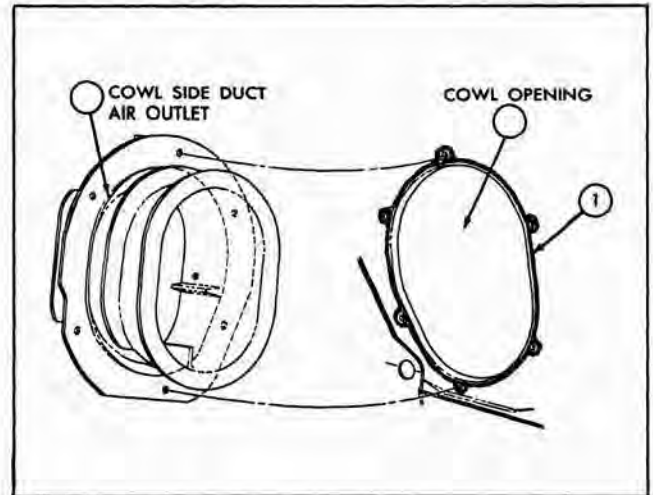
Tempest—Side Duct Air Outlet Sealing
